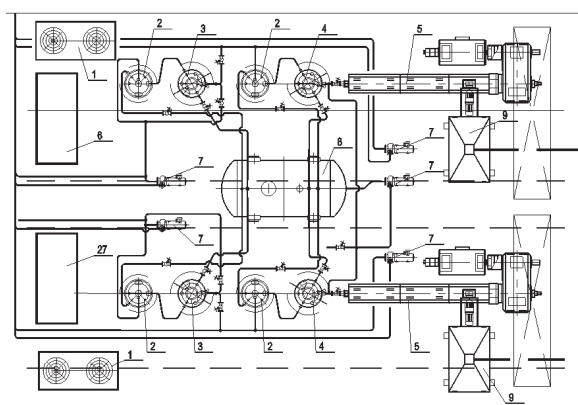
The general arrangements processing equipment on the platform the in the tanks. 1 – Air cooler; 2 – Filter 0.5-0.6-350-T; 3 – Cracking device 5.0-0.6-450-T; 4 – Melting device 5.0-0.6-350; 5 – Extruder; 6 – Deflegmator; 7 – Circulation pump assembly K18.5M-L; 8 – Emergency capacity tank; 9 – Leveling hopper with dispenser
